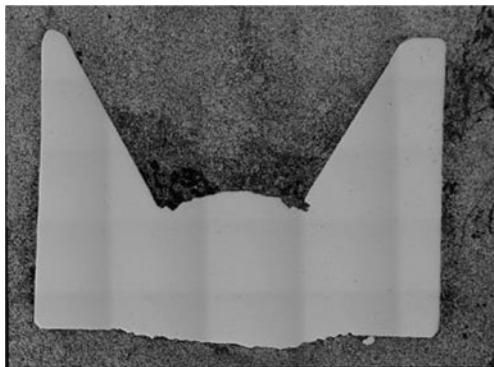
Typical weld bead geometry for sample deposited with a heat input in the upper quartile of the heat input range of interest. The deposited bead appears symmetrical with no pronounced eccentricity in the weld toe
